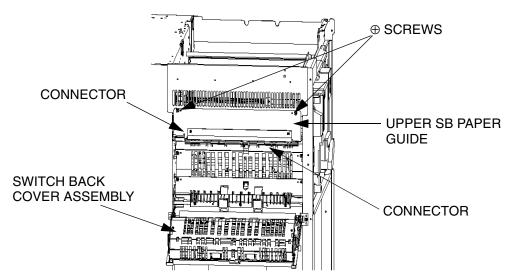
1 Removal of the PF Out Paper Feed Roller Assembly
